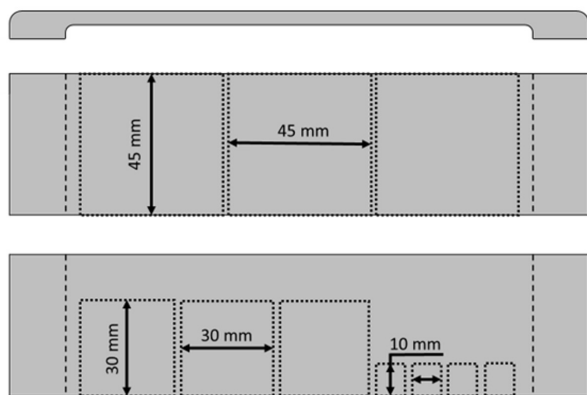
Schematic drawing of the cutting process performed on the pieces extracted from commercial 6060-T6 aluminum profiles.
